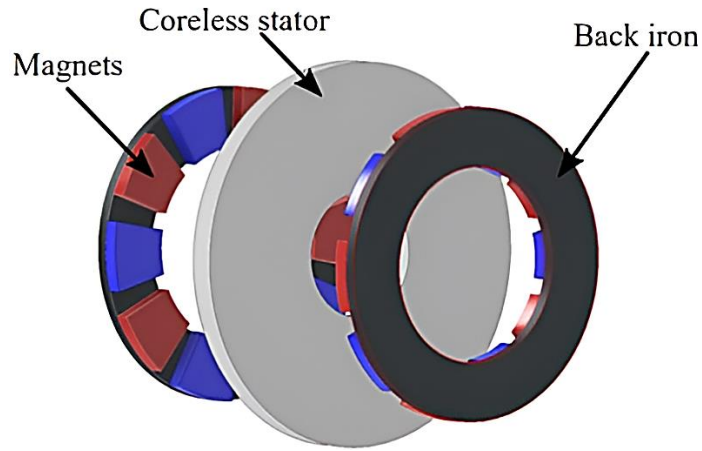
3D exploded view of the coreless axial-flux permanent-magnet machine[19].
